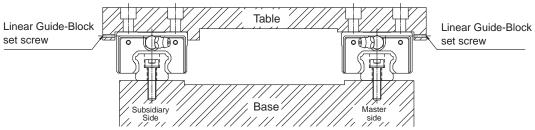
Mounting the Linear Guide without Set Screws on the Master Linear Guide Rail
